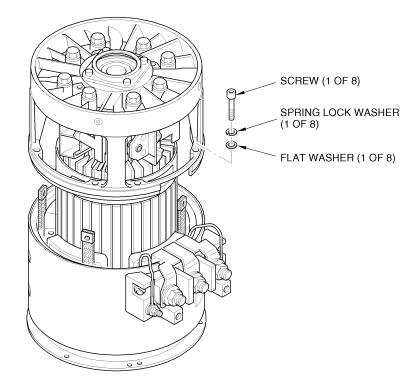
Remove the Bearing and Brush Support Assembly with Attached Armature
